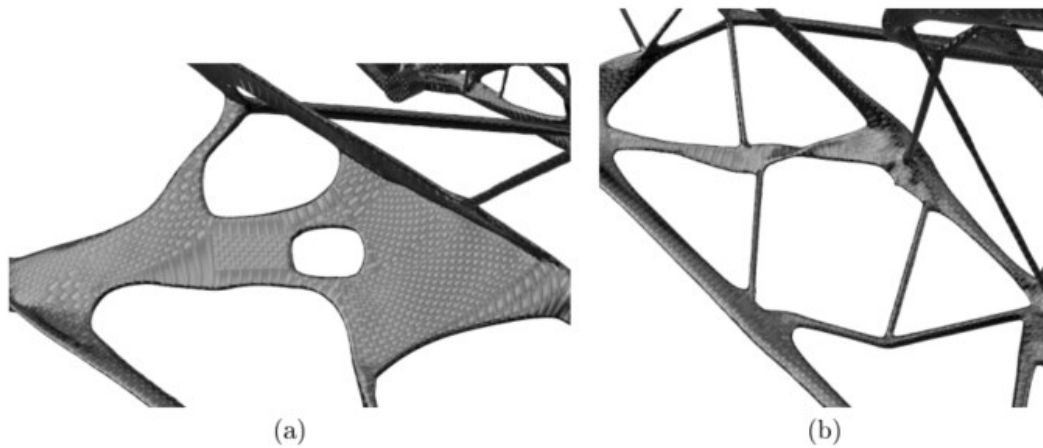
Details of shape feature proposed by GD outcomes. a) Thin geometries and b) Truss structures.
